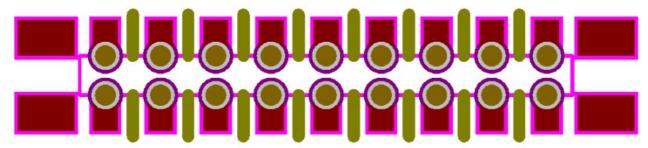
Plug-in PCB Land Pattern (Unit: mm)
